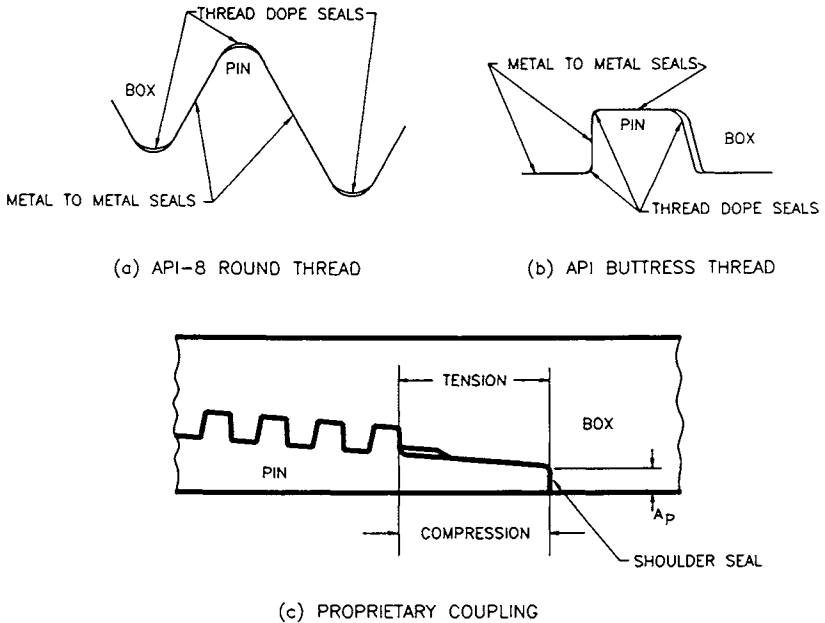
Metal-to-metal seal: (a) API 8-Round thread, (b) API Buttress thread, (c) proprietary coupling. (After Rawlins, 1984.)
